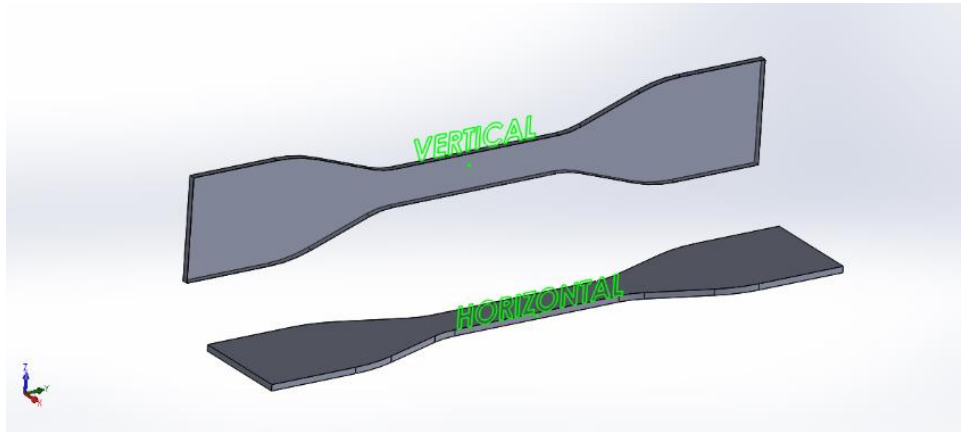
The drawing for tensile testing specimen type 5B of ISO 527-2:2012.
